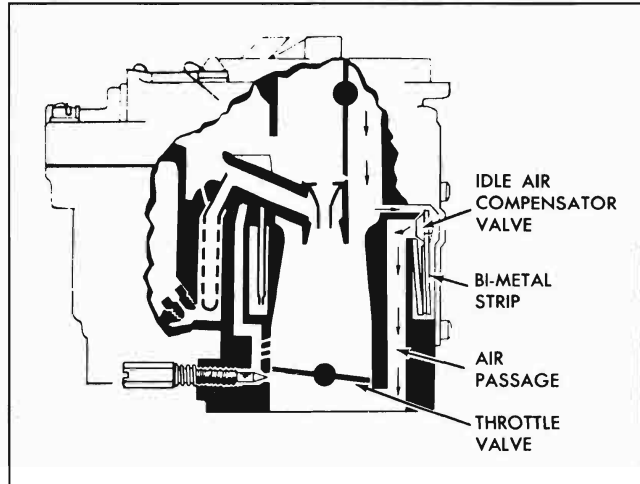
B-12 Idle Compensator (Cars with Hydra-Matic and Triple Two Barrel Carburetor—Center Carburetor)
